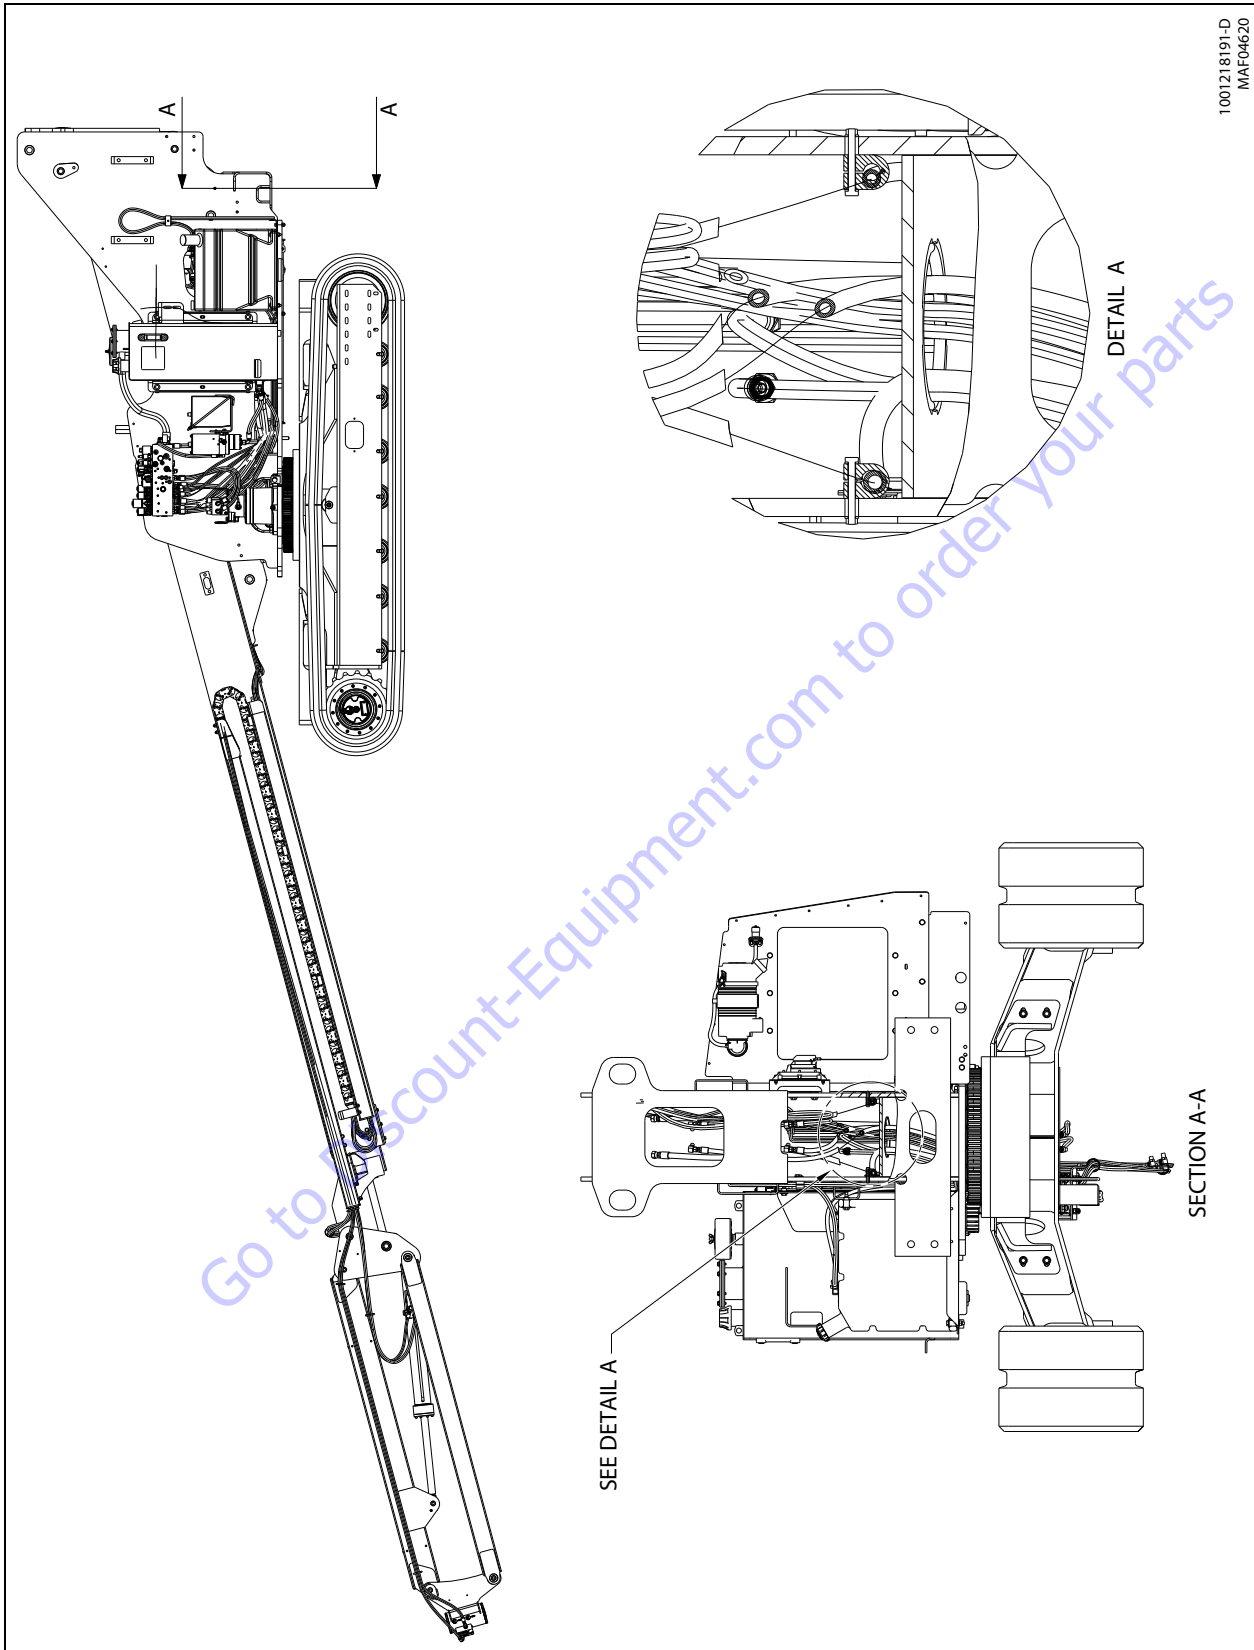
Hydraulic System Installation (460SJC) - Sheet 1 of 15
